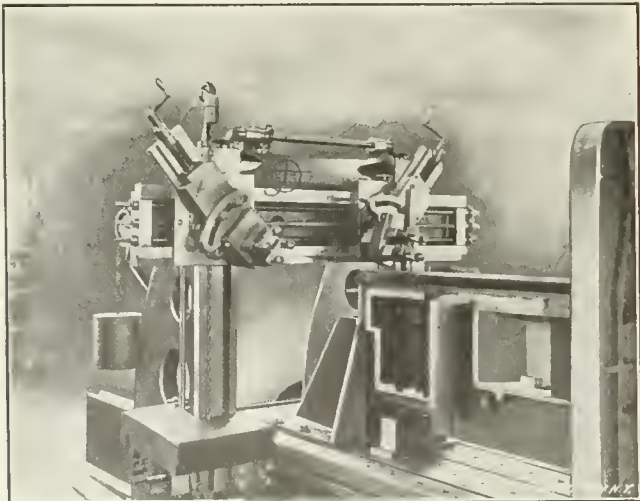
Rough Planing on Face to take out Spring and inspect the Casting
